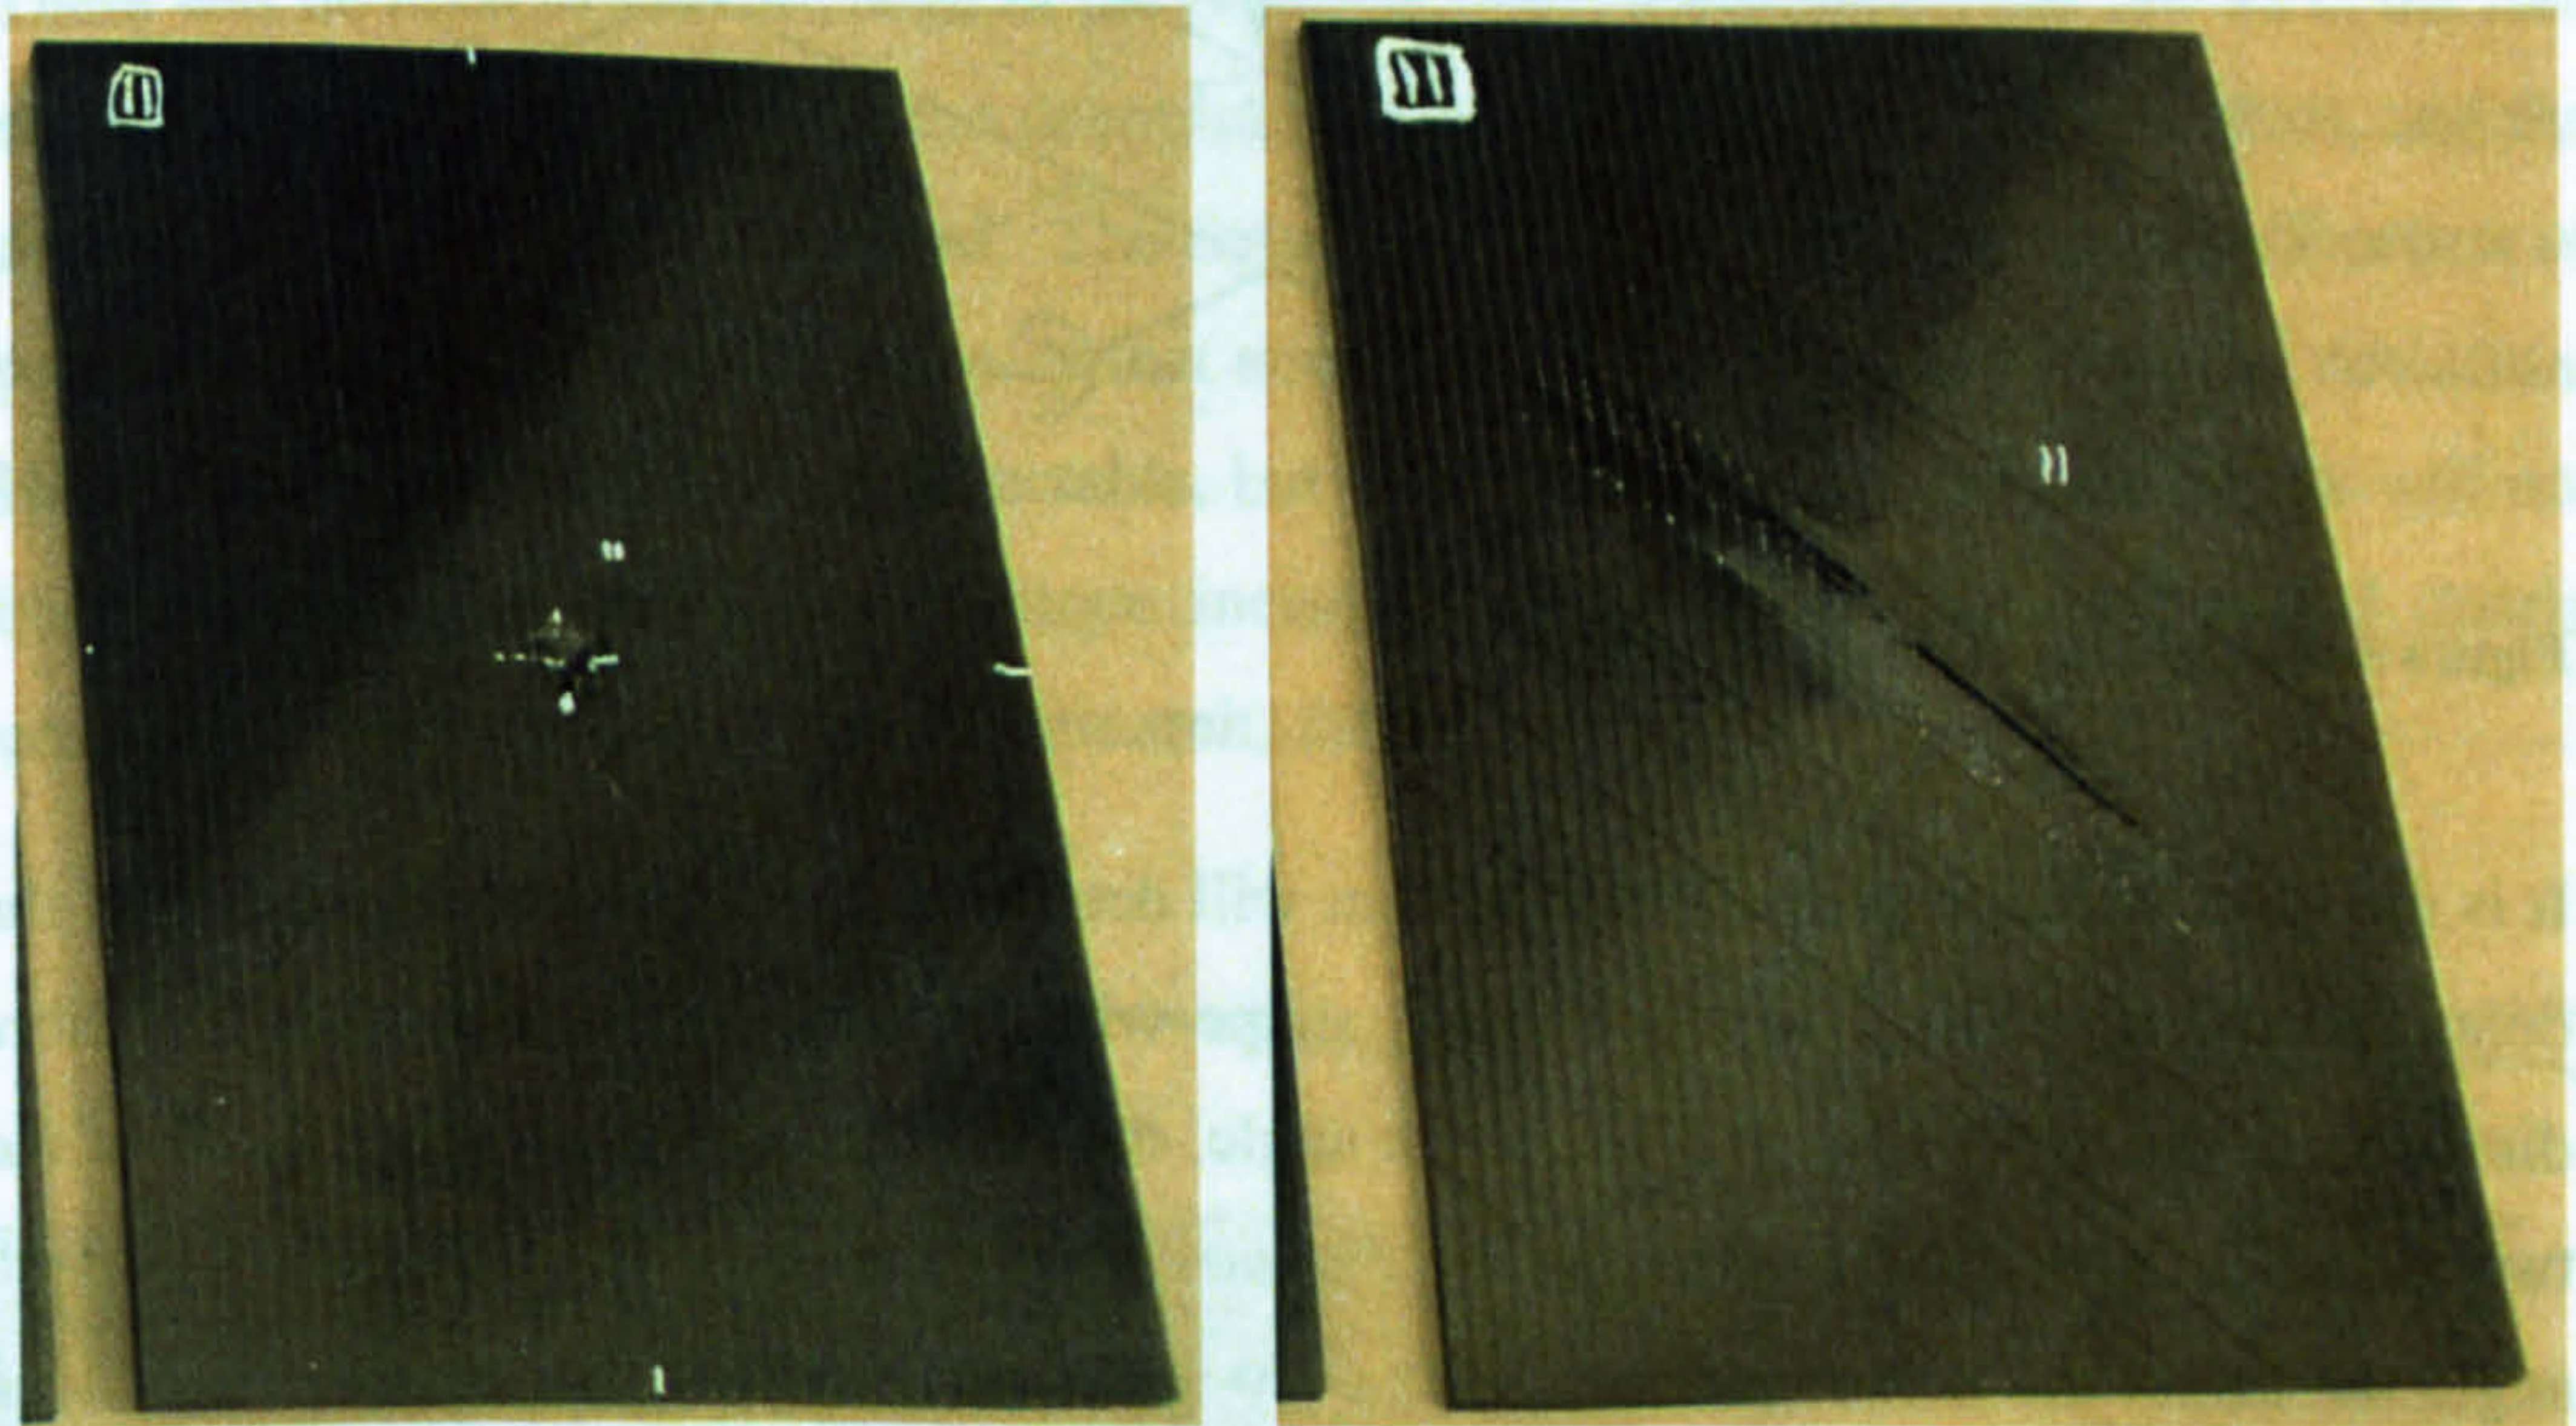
8 mm thick plate impacted with 375 J front and back face surface damage
